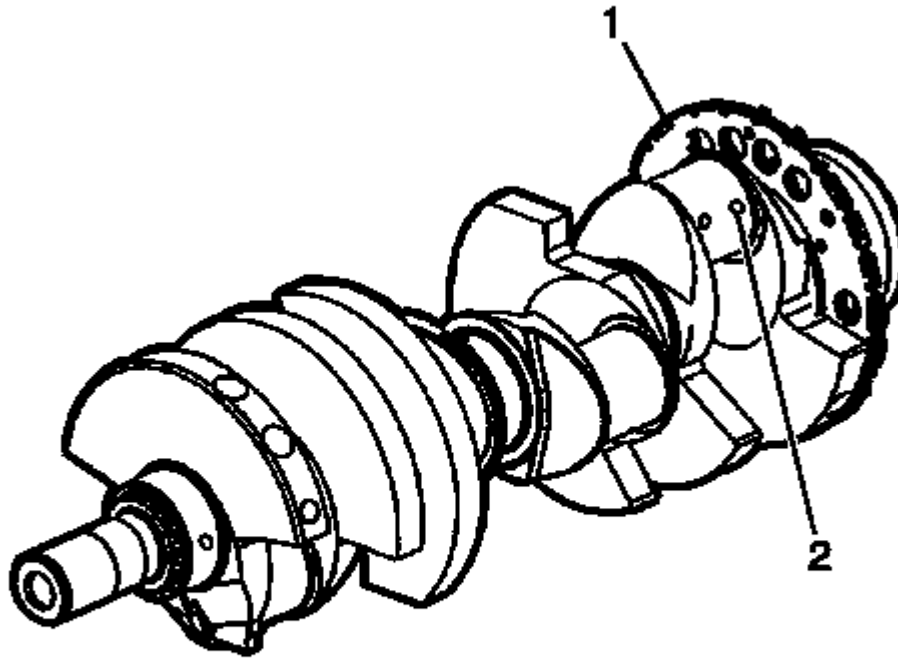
Oil Passages & CKP Reluctor Ring Teeth
